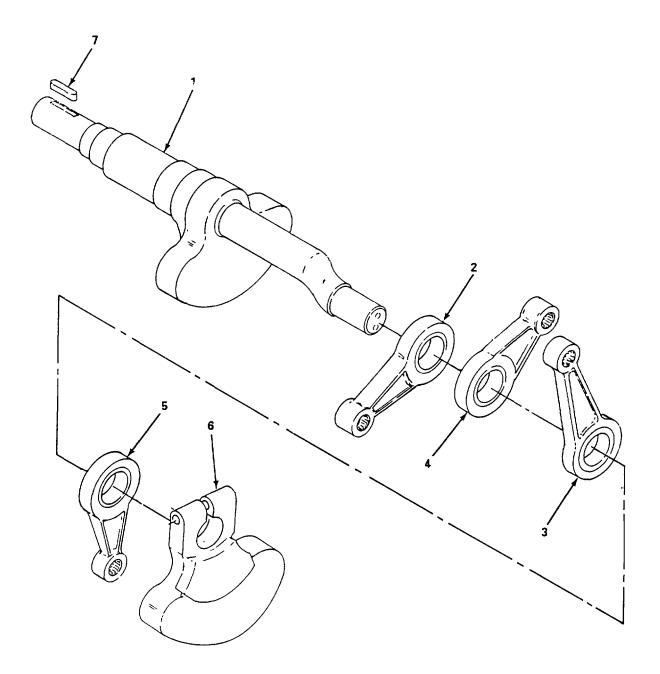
Compressor Crankshaft Assembly, Repair.
